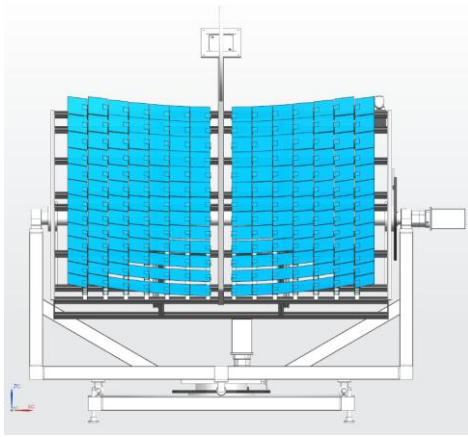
FIGURE II. PROTOTYPE 3D MODELING ASSEMBLY
